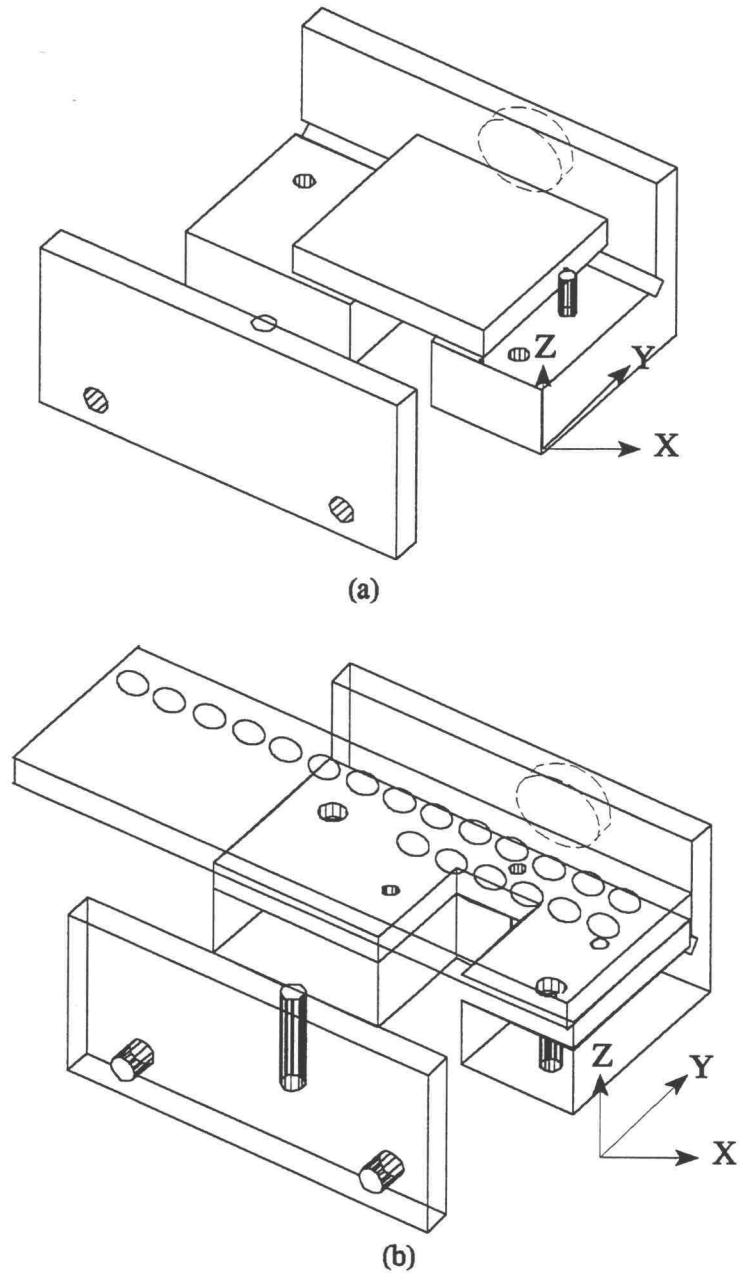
Designed fixture usage for experimental processes: (a) in sample work pieces and AE spectrum collection process, and (b) in drill-flank wear production process.
